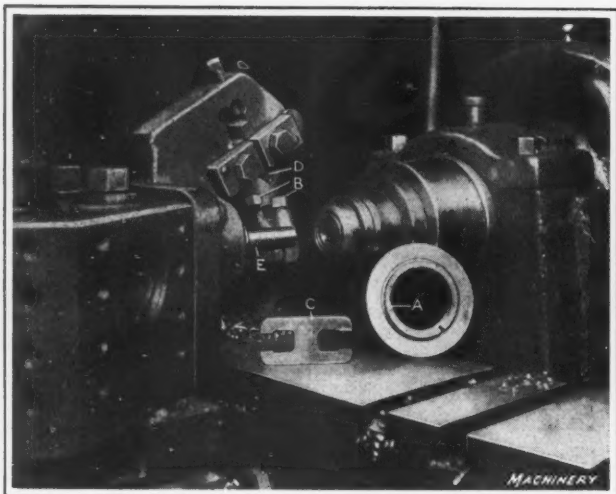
Bardons & Oliver No. 4 Turret Lathe equipped for turning and facing Clutch Flange Nuts of the Type shown in Fig. 3
